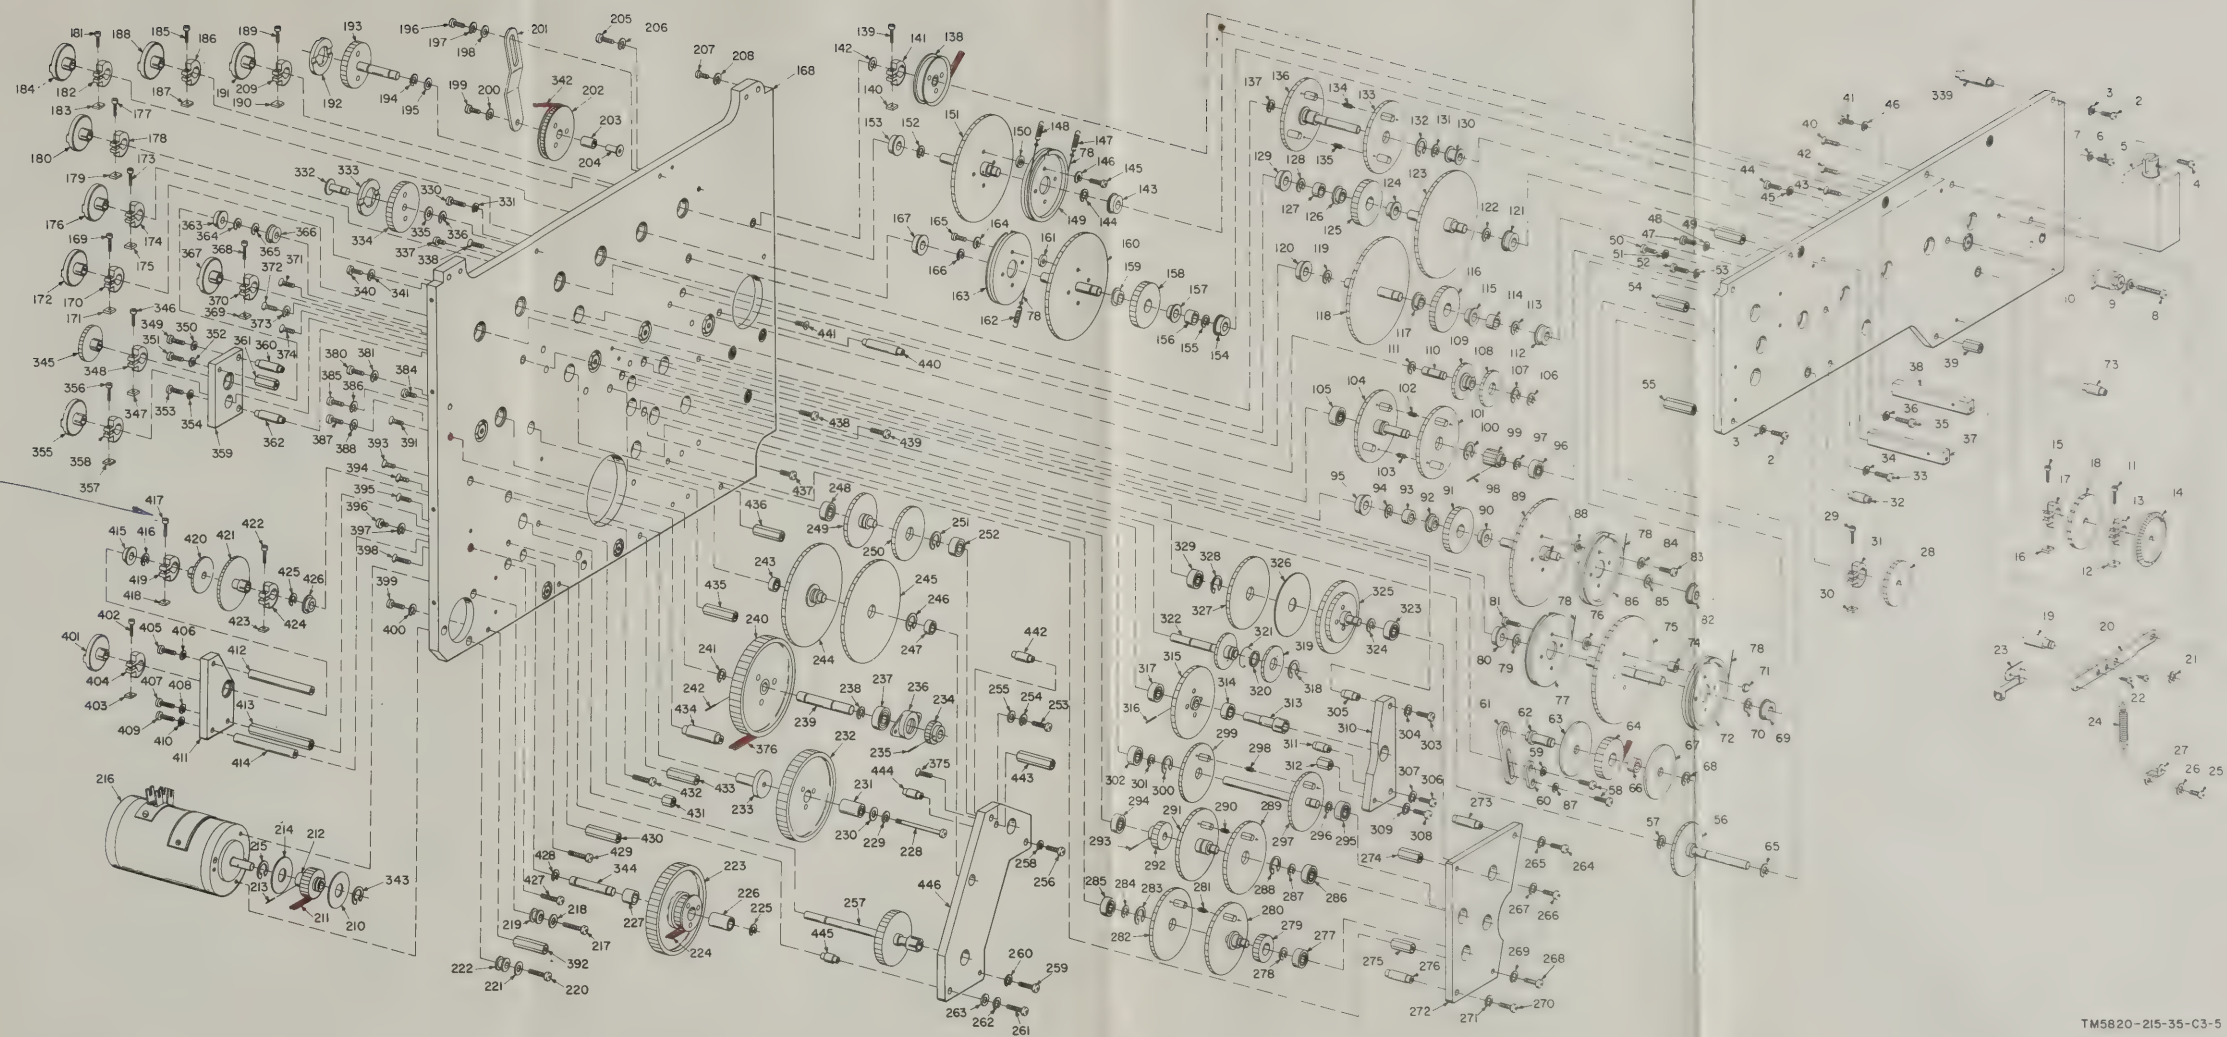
Exciter-monitor main gear train, exploded view—Continued.
